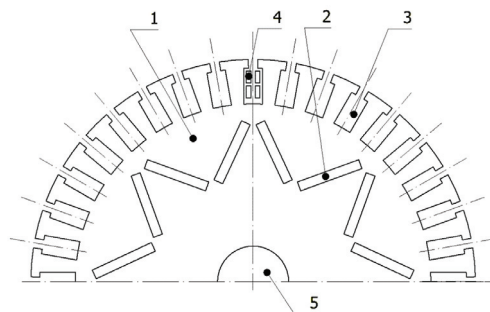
Cross-section of the VPM motor rotor core with V-shape permanent magnets [1]
